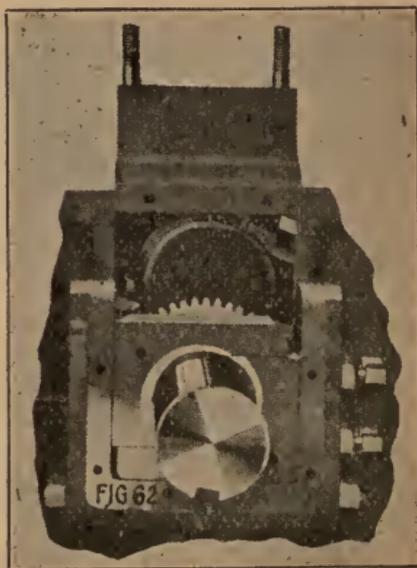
Showing simple means of adjusting Avery mainshaft bearings.
